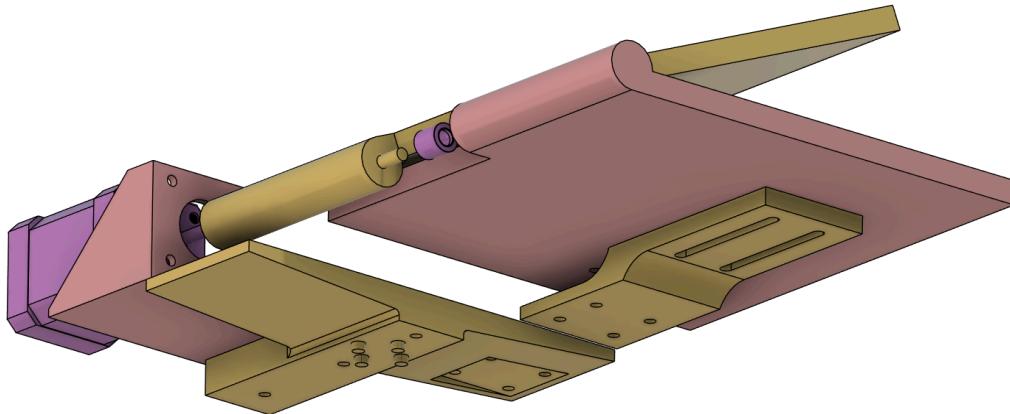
Exploded Assembly of the Hinging Plate Mechanism
